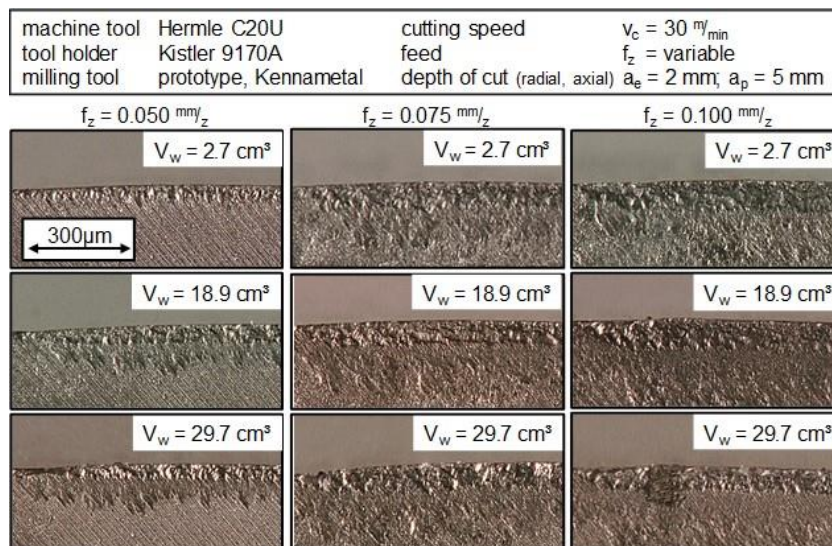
Tool wear at the rake face of the cutting tool determined for constant steps of the material removal V_w
